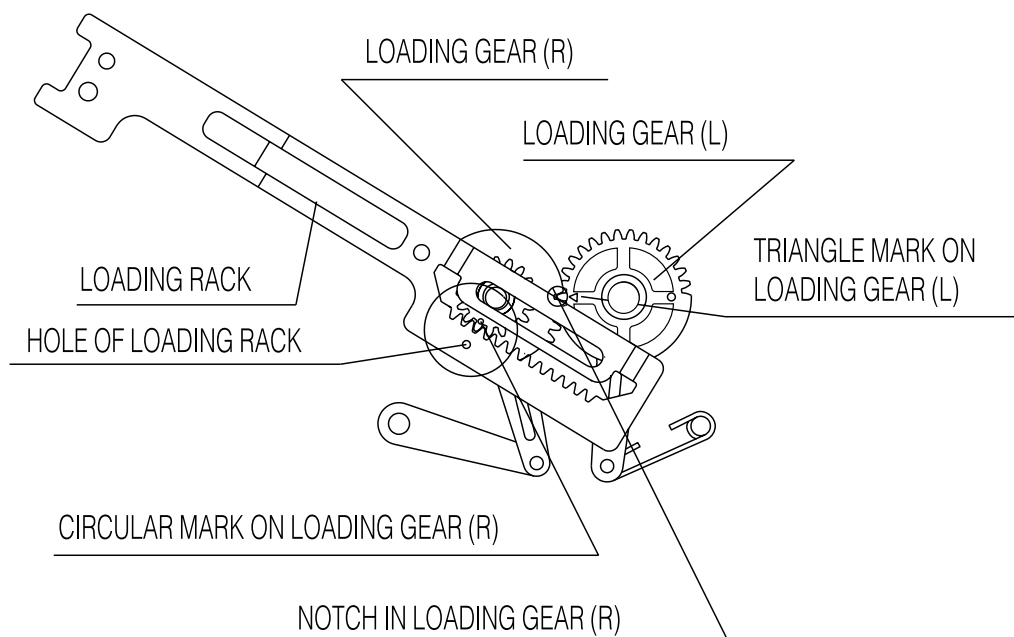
ASSEMBLY OF the R&L LOADING ASS'Y & LOADING RACK ASS'Y
